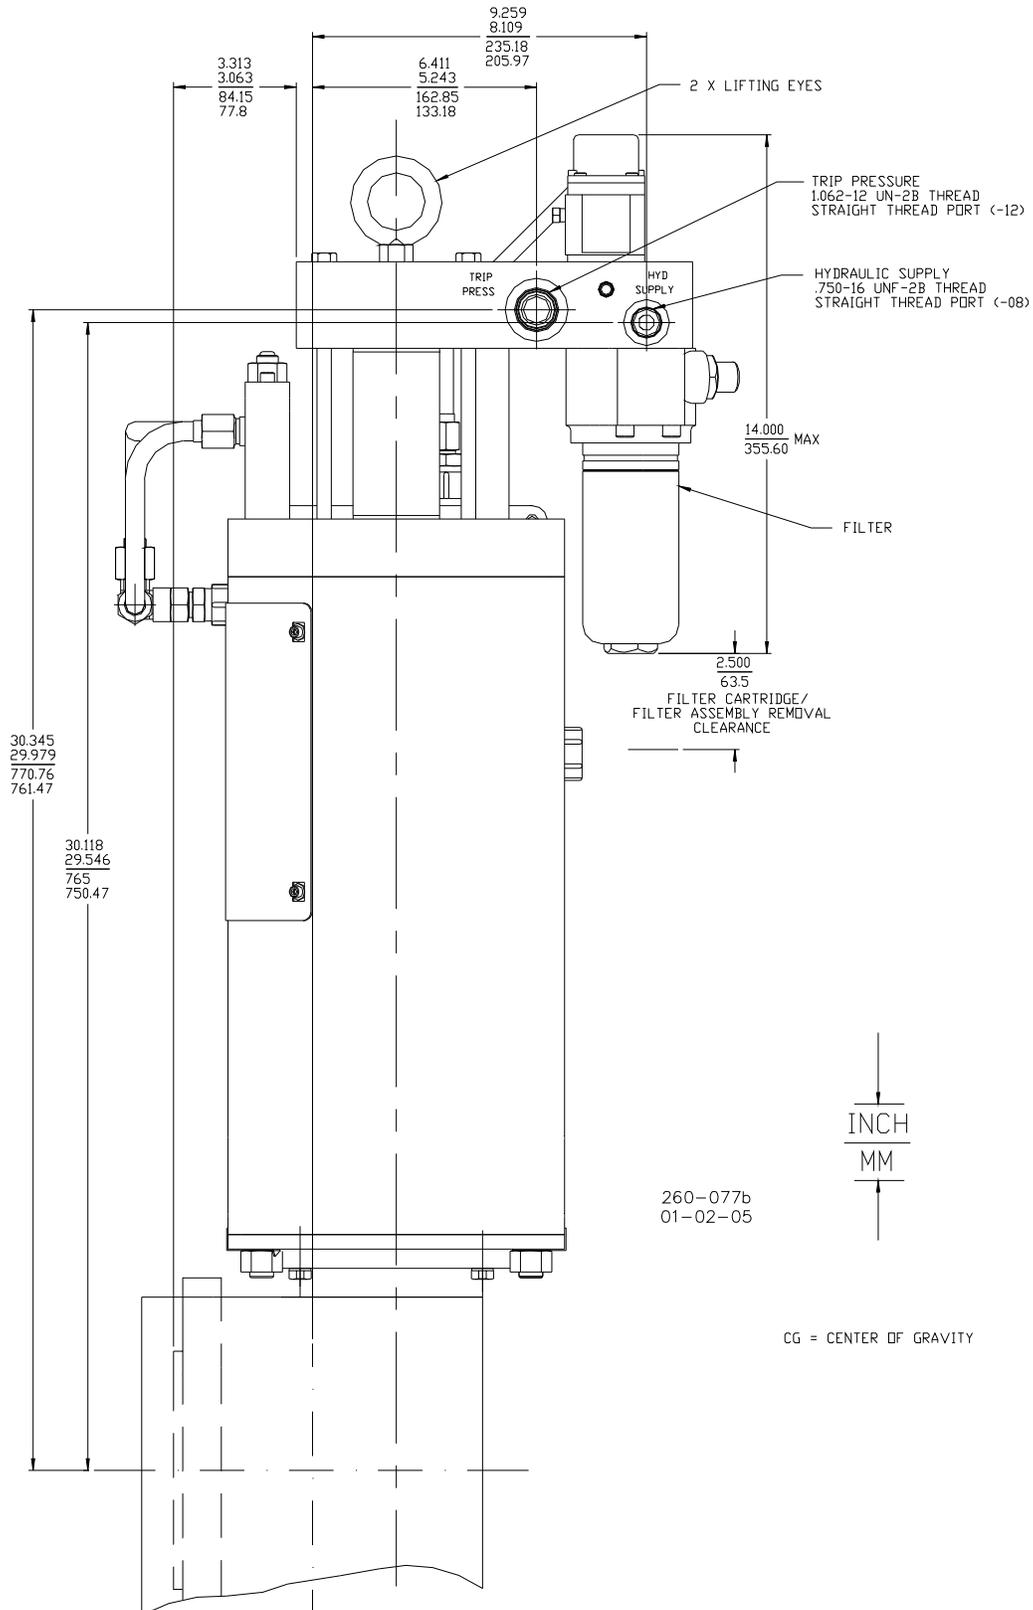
Gas Stop/Ratio Valve Outline Drawing (4-inch)
